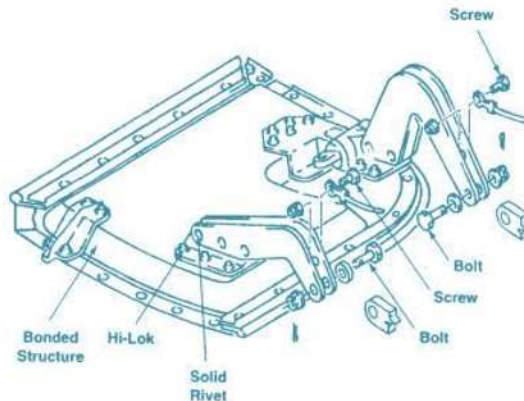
Different Assembly Techniques on a Panel Riveting
